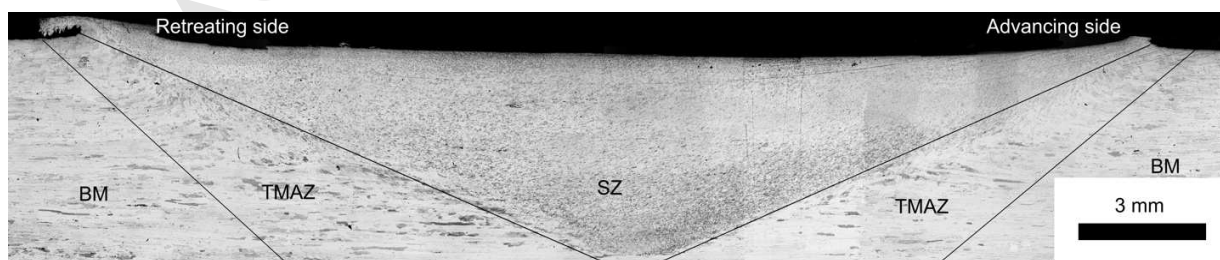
A collaged optical macrograph of the FSWed APMT™ plate showing the transverse cross section of the weld – adapted from ref. [19].
